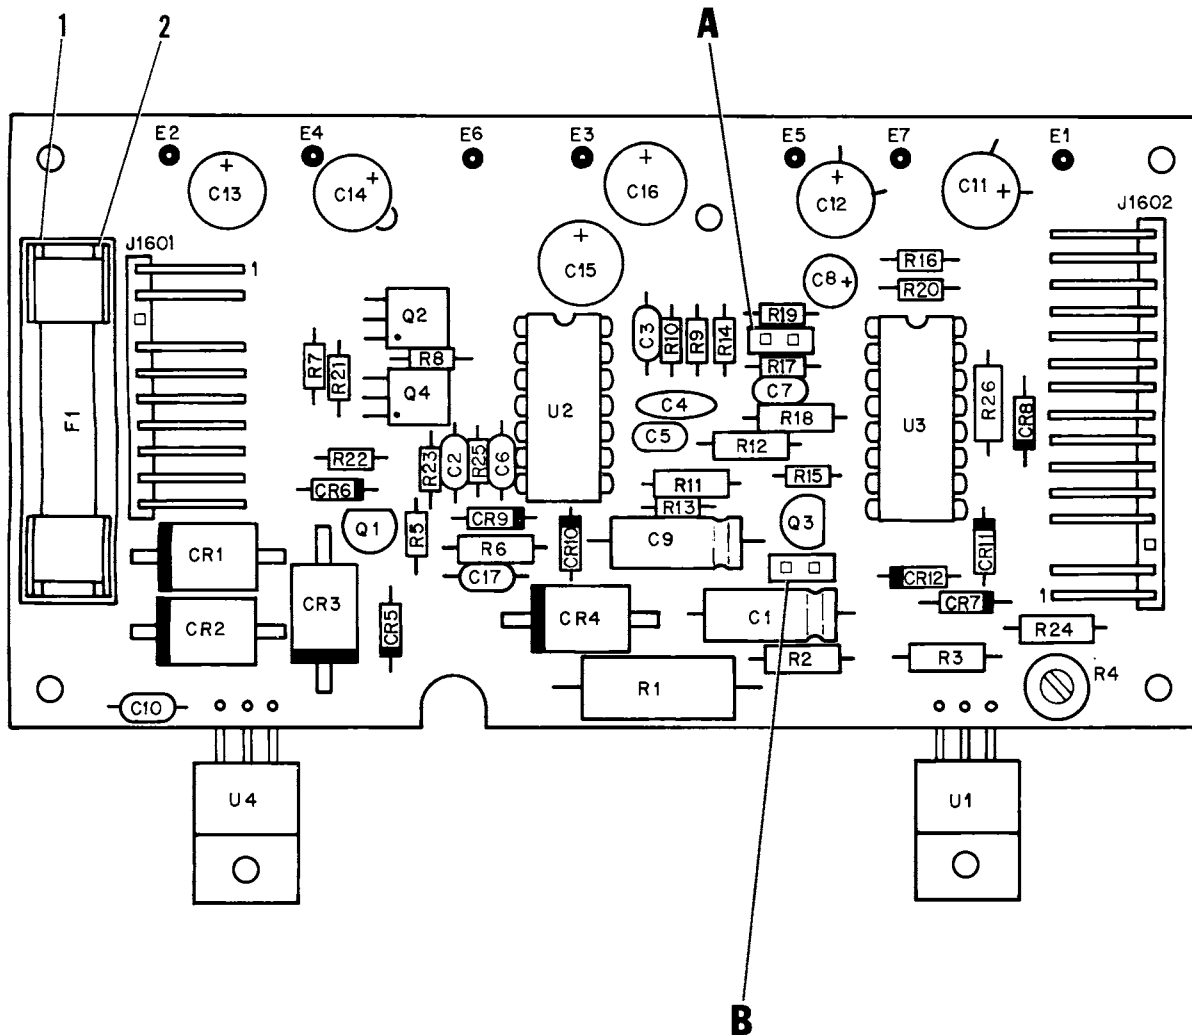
BATTERY CHARGER PC BOARD ASSEMBLY
